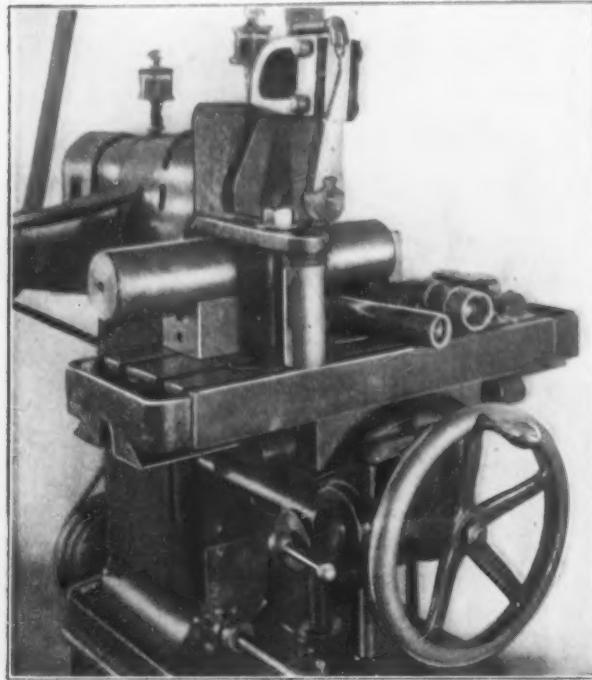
An Oscillating Milling Machine Used for Cutting the Slots in Reamer Shells and the Sockets in the Hexagon Wrenches.
